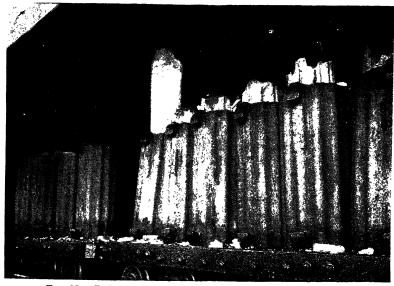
Pulling an ingot from a mold. (Bethlehem Steel Co.)
